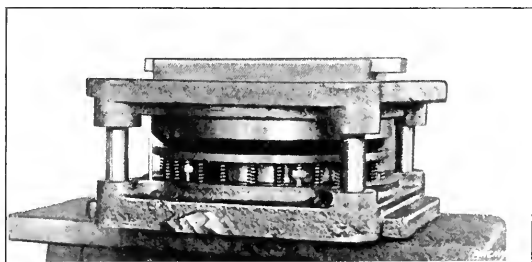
Assembled Punch and Die for the Field and Pole Punchings
